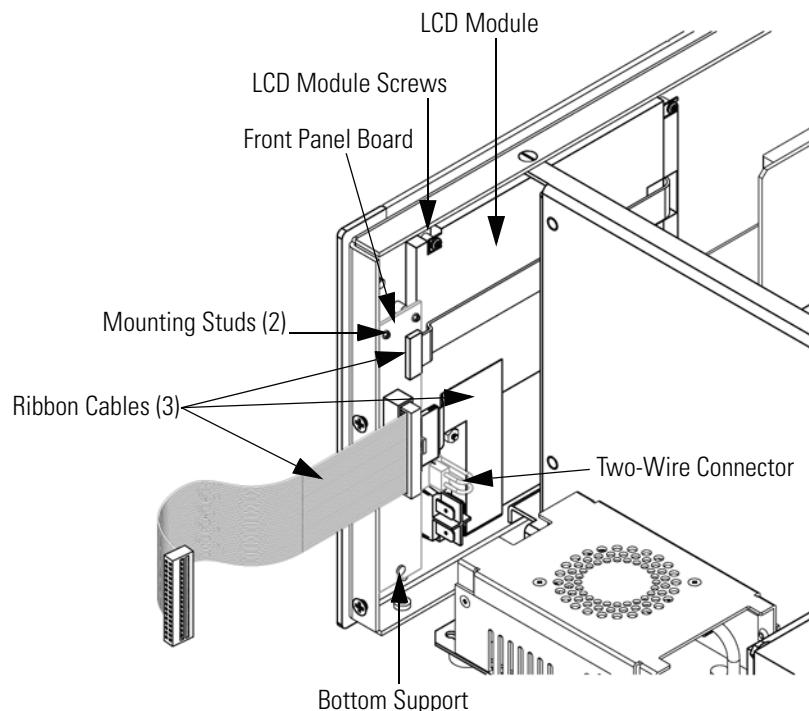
Replacing the Front Panel Board and the LCD Module
